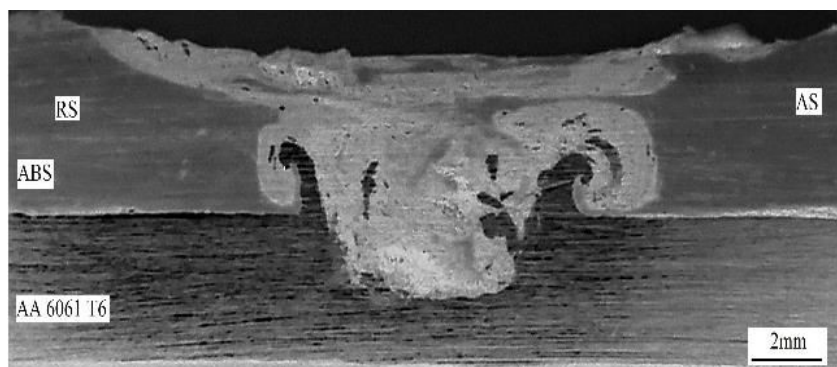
Cross-sectional view of joint welded at 500 rpm tool rotation , 14 mm/min feed rate and 20 mm shoulder diameter.
